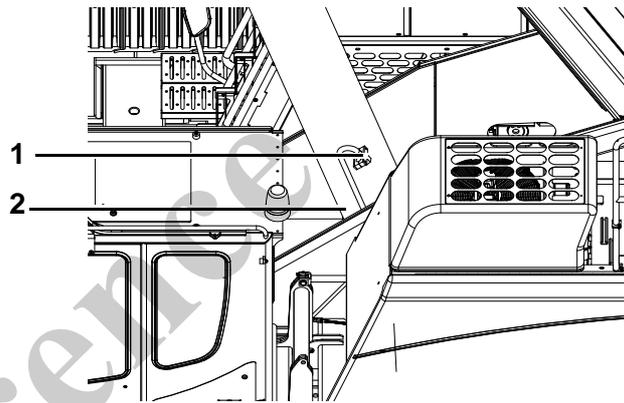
Pressure sensor (1) on the luffing cylinder (2)
